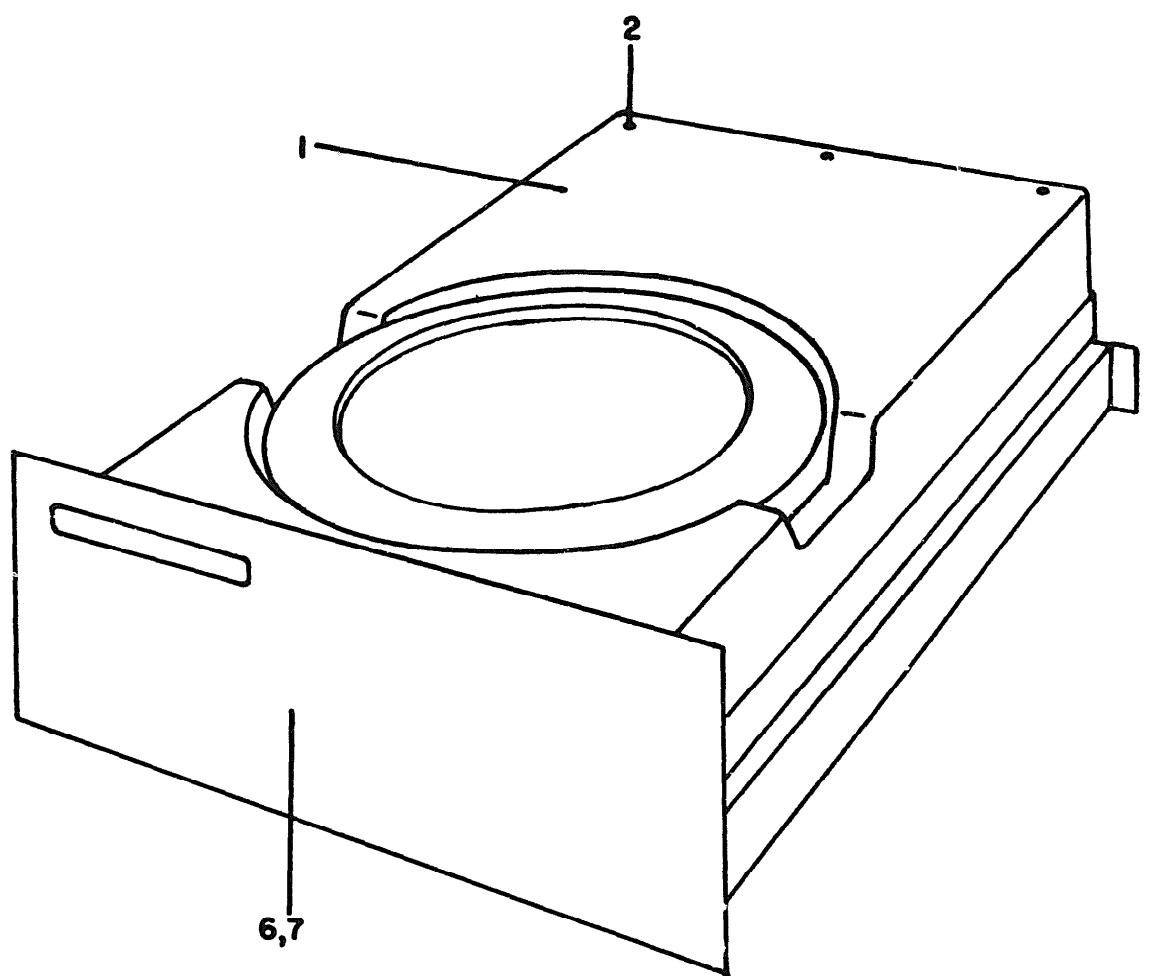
Disc Drive Assembly (Sheet 1 of 5).
